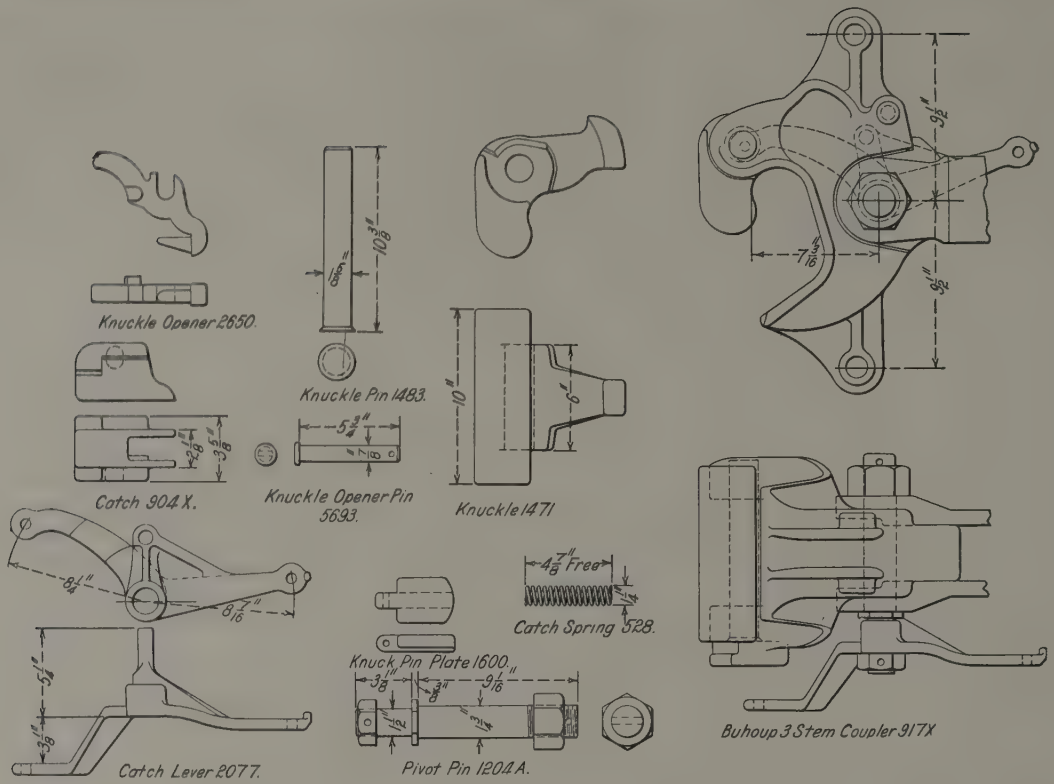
Buhoup Three-Stem Passenger Coupler and Parts. The McConway & Torley Company.
